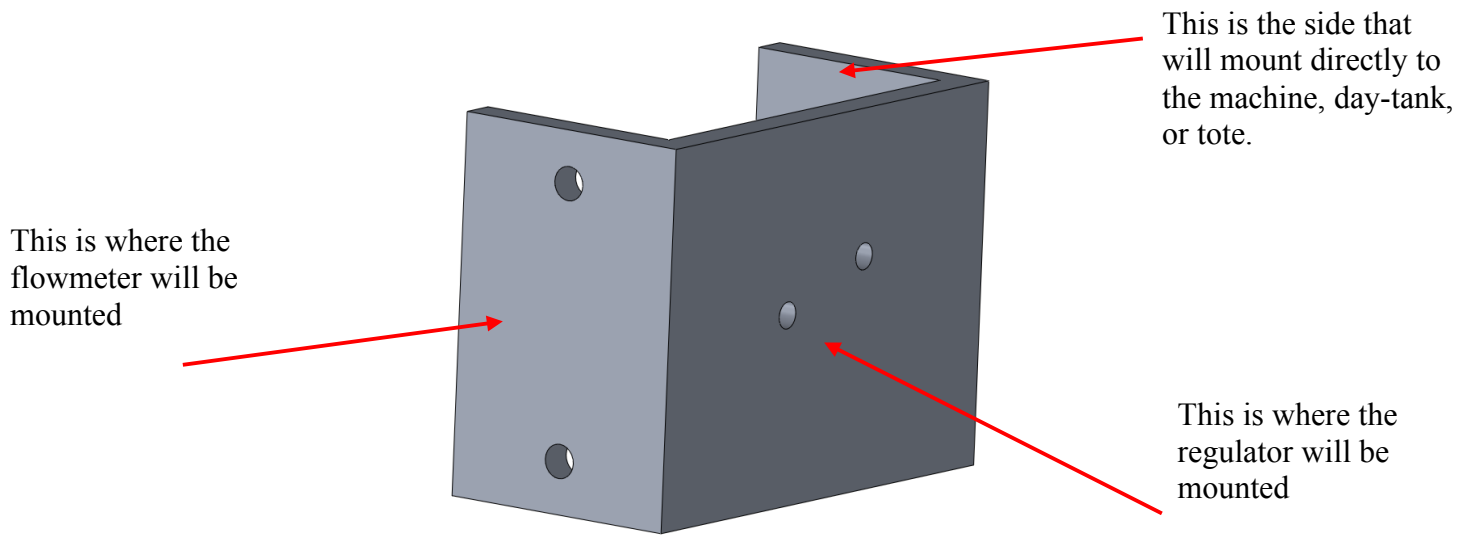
shows the Solid-works model of the mounting bracket for the smaller rotameters
